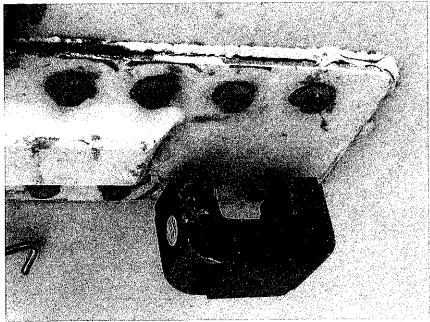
Ferrous bolts should be replaced with stainless. This piece is on the starboard "A" frame under side.
